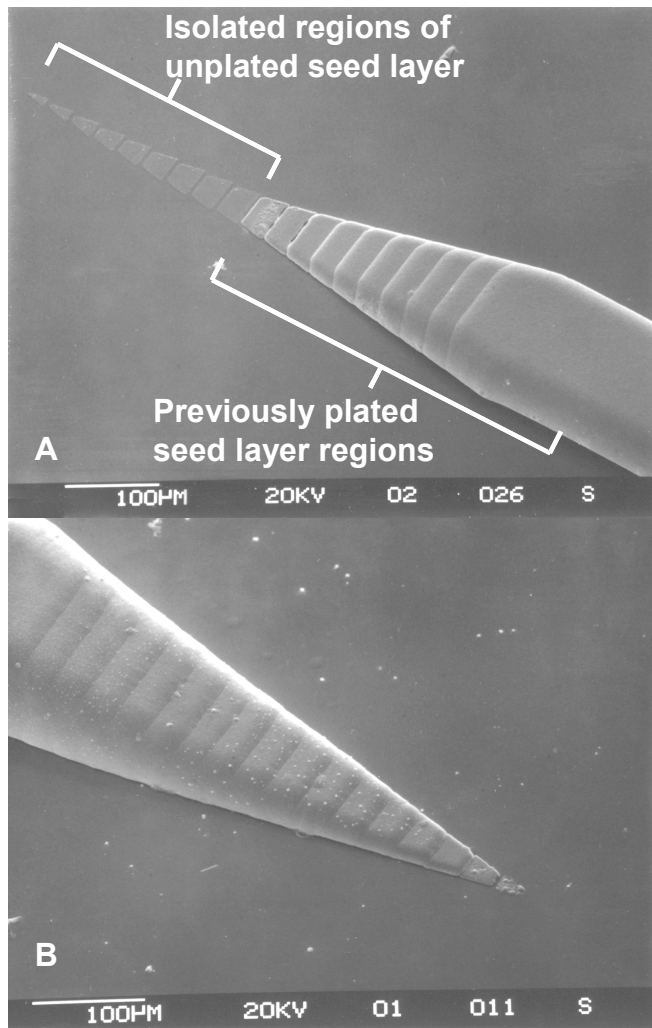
(a) Partially completed 3-D probe plating process. (b) Fully plated tapered probe
